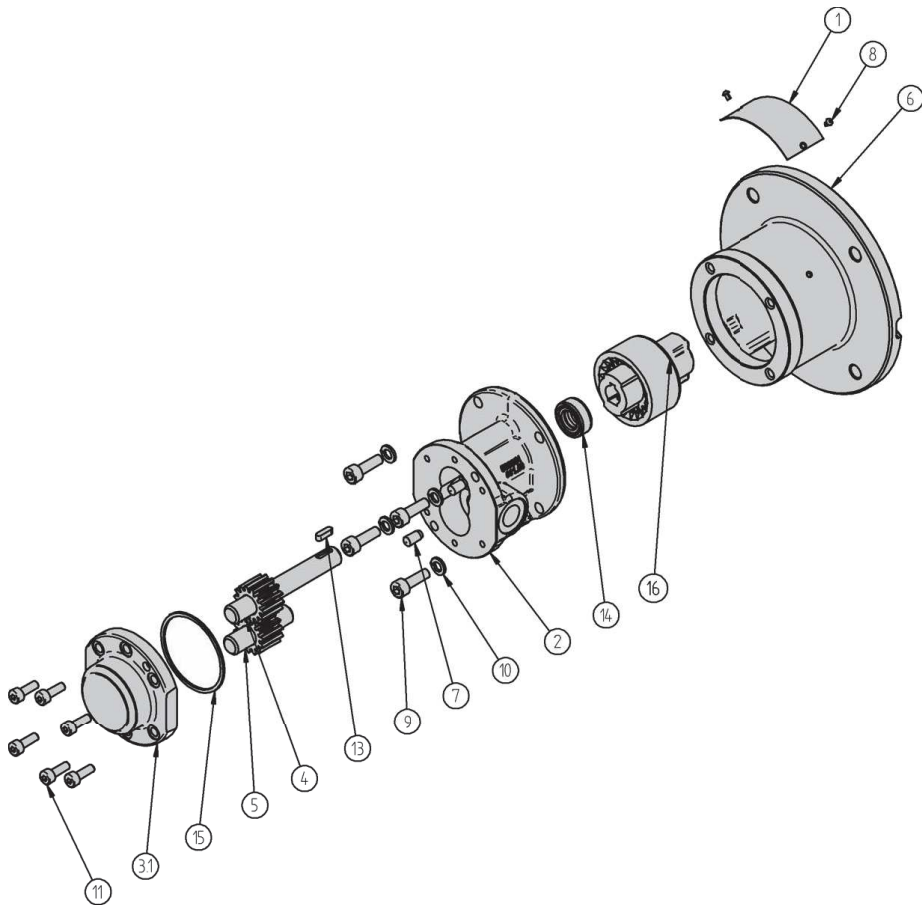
Exploded view of the gear pumps with the frame sizes 41, 51, 52, 76, 77, 351, 352, 451, 452, 551, 552
